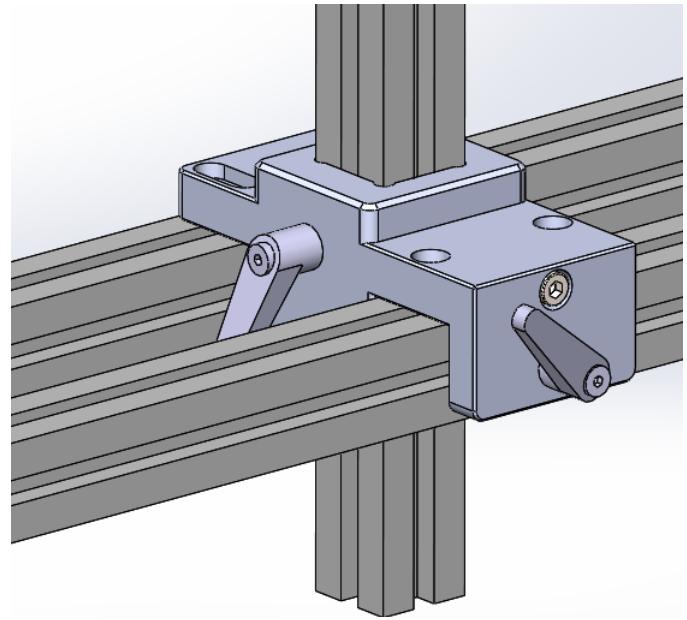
Translation unit assembled on the main frame of the welding-jig
